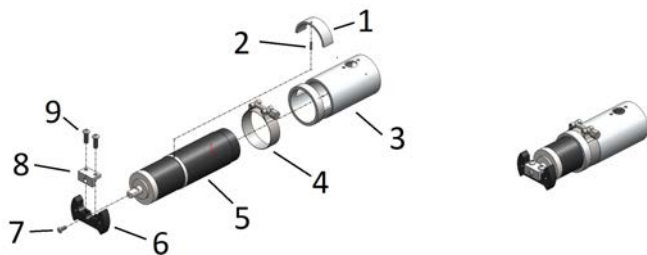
Drive motor, located in each of the six wheels. (right) Assembled (left) Exploded view (1) Motor armor clamp half (2) Motor armor torsion lock pin (3) Motor armor (4) Motor armor clamp (5) IG-52 planetary gear motor, 136:1 gear ratio, 24 volt (6) Wheel hub (interfaces with wheel rim) (7) Axial restraint bolt (8) Hub clamp (9) Hub clamp bolts
